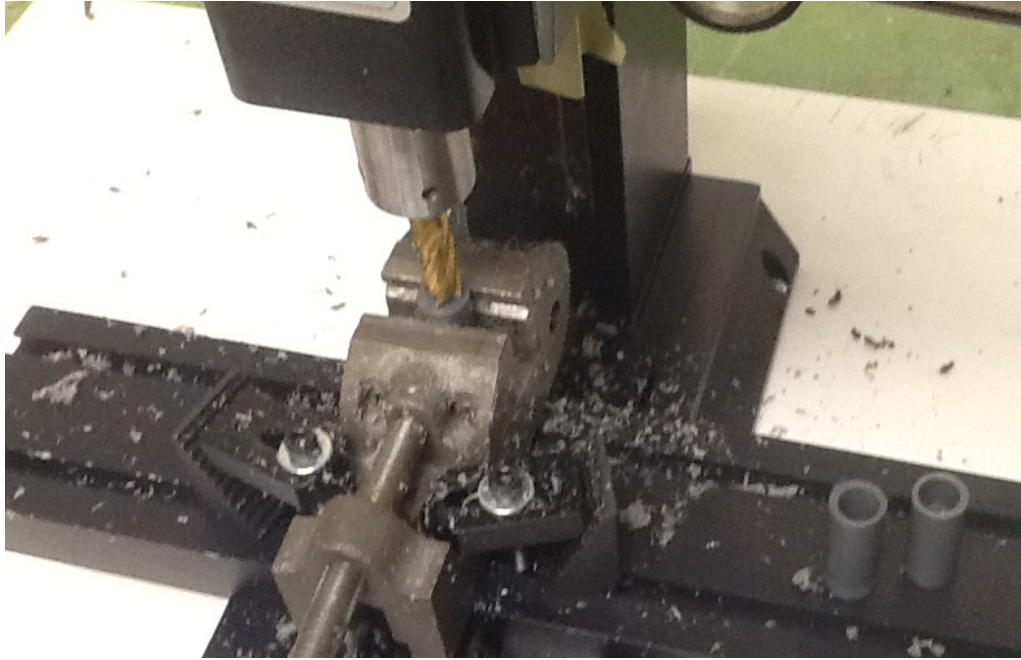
4: Fabrication of socket step 4. A mill was used to bore a 3/8" hole on the unturned side of the socket. Two bored pieces can be seen in the lower right corner.
